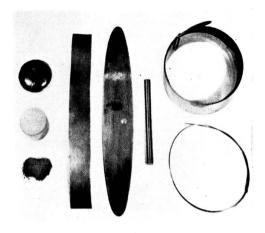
Zr powder, Zr cold press compact, melted ingot, cold-rolled sheet, hot-rolled strip, machined Zr bar, coiled cold-rolled Zr foil 0.008 in. thick, and rolled Zr wire 0.03 in. diameter. (Reduced to slightly less than one-half size.)
